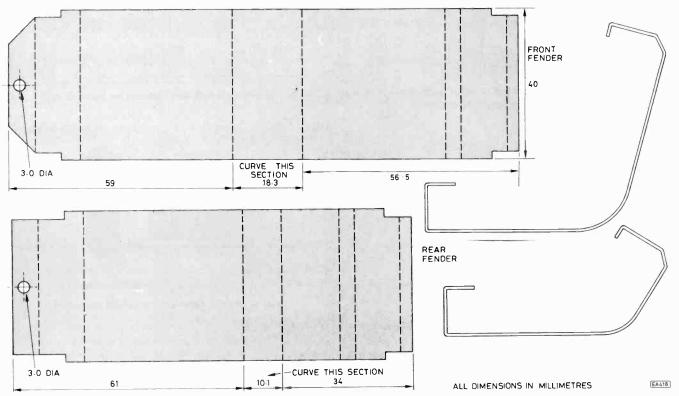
Fender cutting and bending details. Note this drawing is full size and can be used as a template for cutting and bending the fenders
